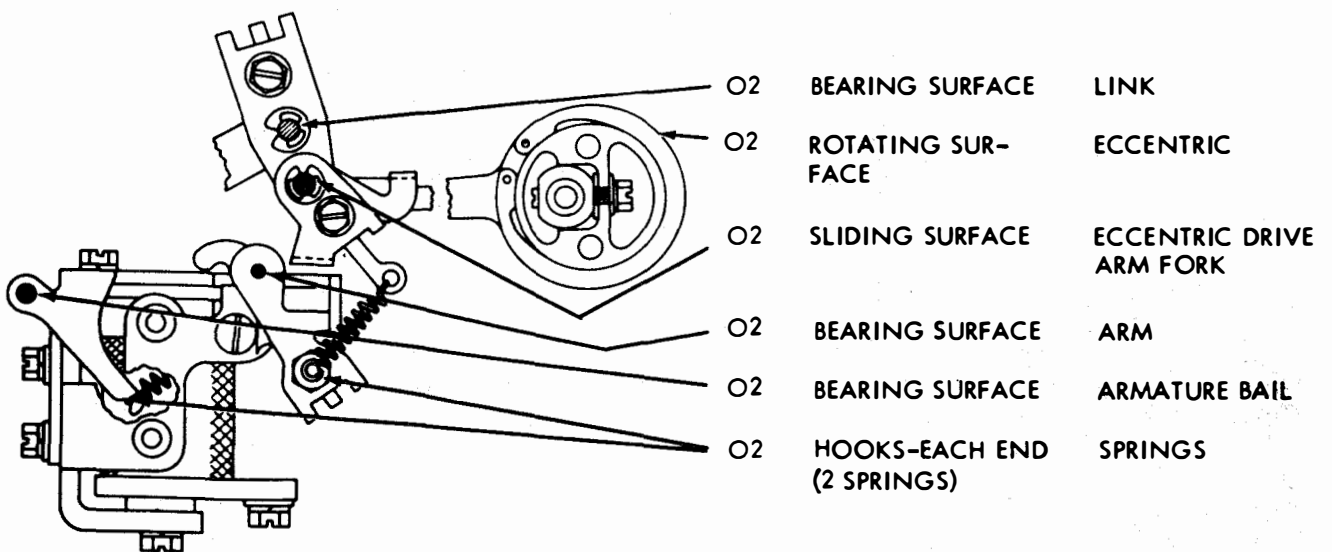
Backspace Mechanism for Chadless Tape (Power Drive)
